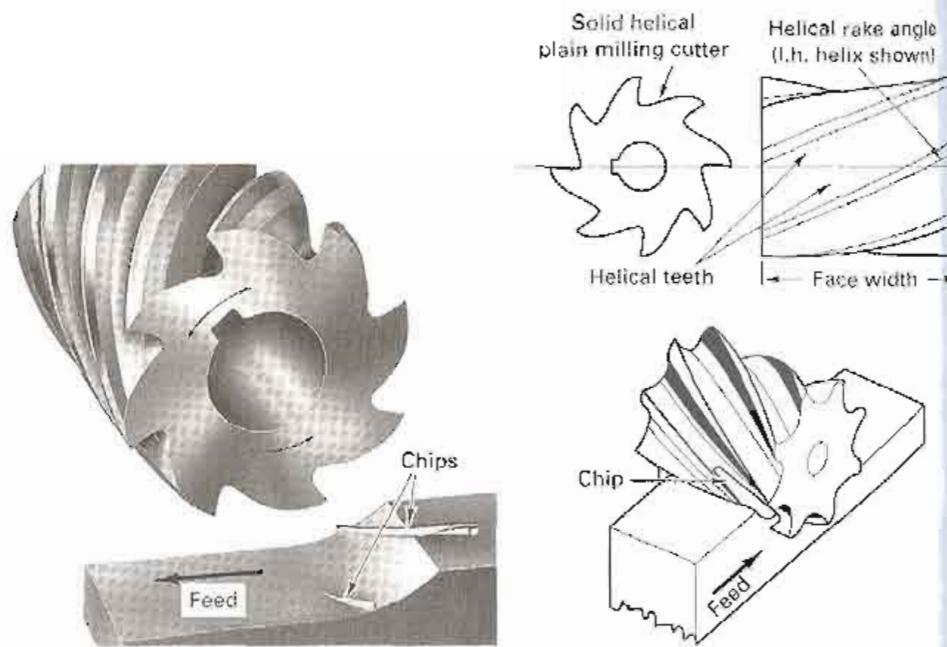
The chips are formed progressively by the teeth of a plain helical-tooth milling cutter during up milling.
